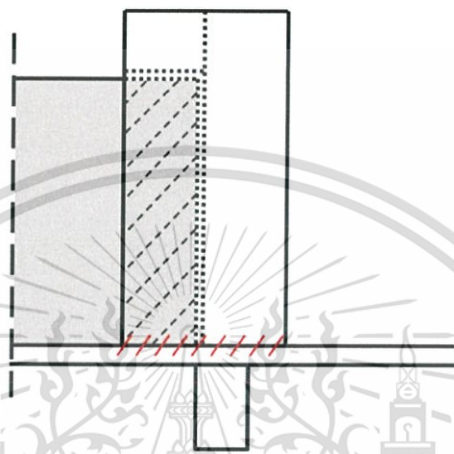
The holder pillar geometry and dimension (mm.)
